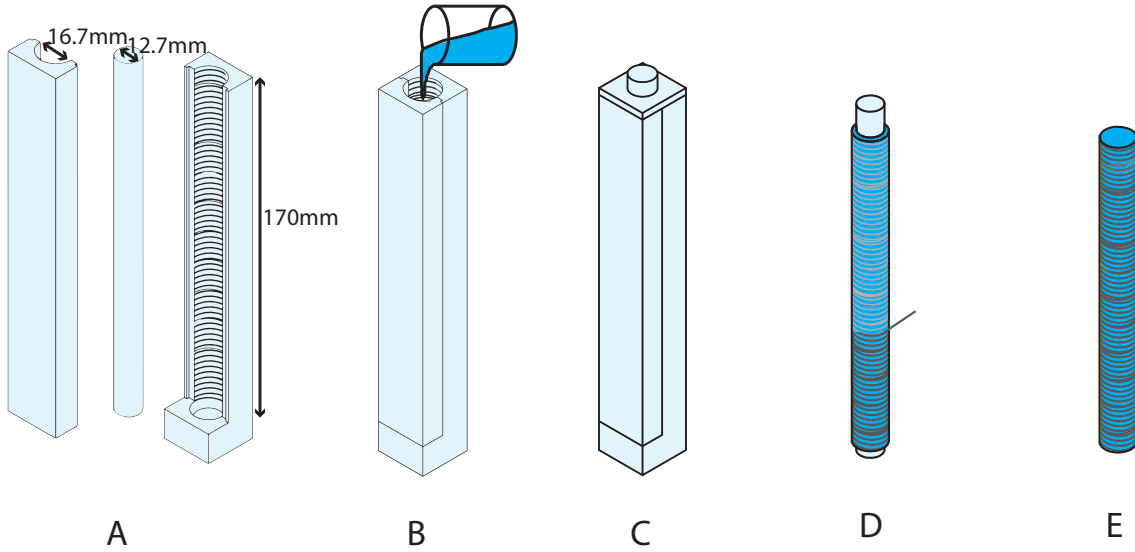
Fabrication of an extending/expanding/twisting actuator. (A) A metal rod and 3d printed mold are used to mold the elastomer. (B) Elastomer is poured into the mold. (C) The rod is inserted into the mold and held in place with a 3d printed cap. (D) The mold is removed and Kevlar fiber is wound around the outside of the actuator. (E) The actuator is capped with Sil-Poxy.
